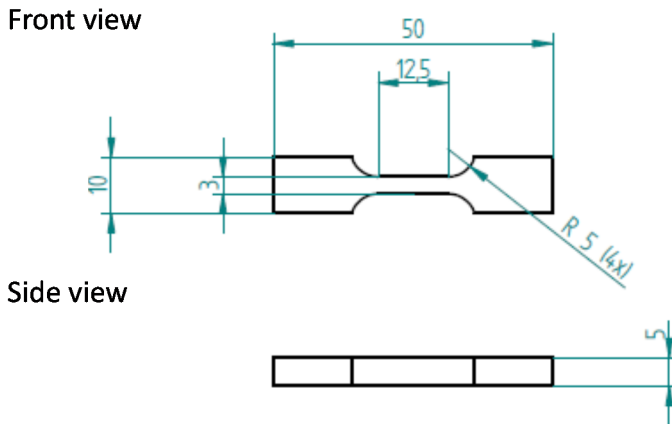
Drawing of the tensile geometry used for tensile tests; All dimensions in mm
